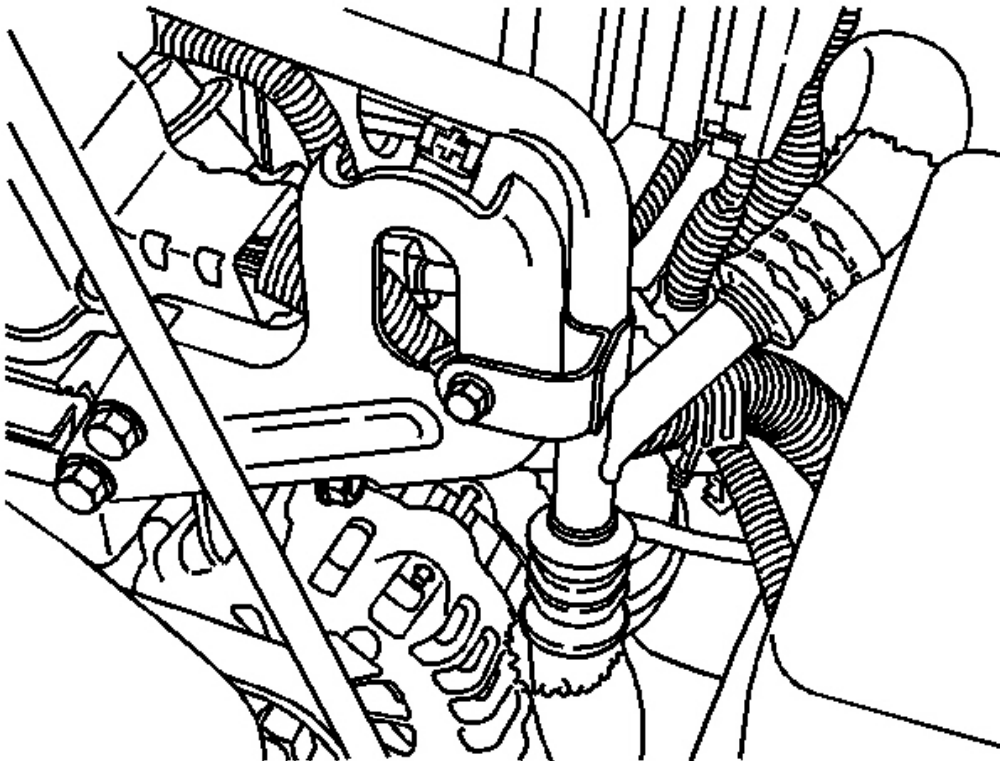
View Of Engine Lift Hook & A/C Bracket Bolt
